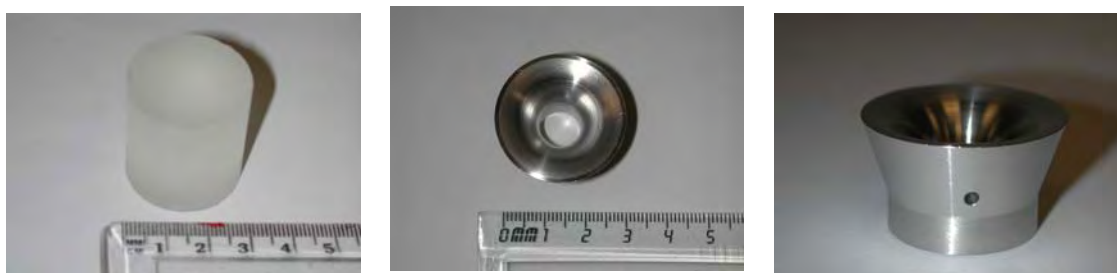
Ultrasonic drilled SF57 glass billet and unclad fibre machined cut stainless steel die.
